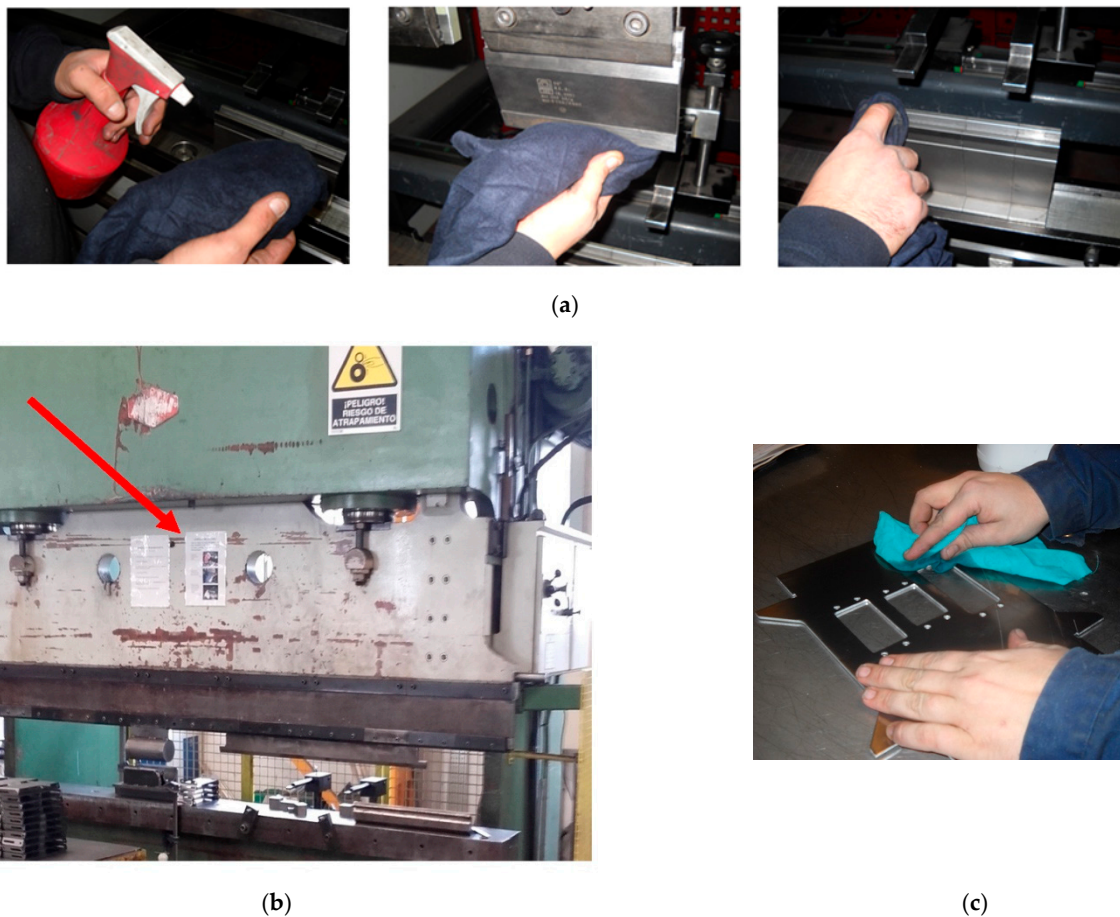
(a) Bending tool cleaning sequence, (b) Instructions for cleaning the bending tools placed on the press brake, (c) Cleaning the workpiece with acetone.
